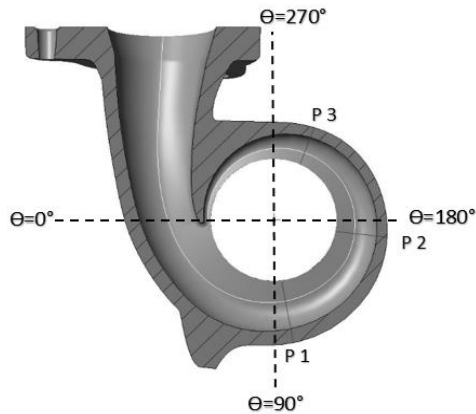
Pressure sensors' angle in the section view of the turbine housing.
